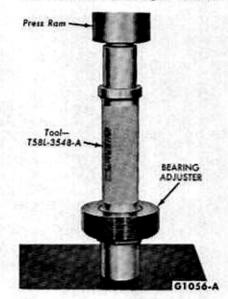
Steering Shaft Upper Bearing Cup Installation
